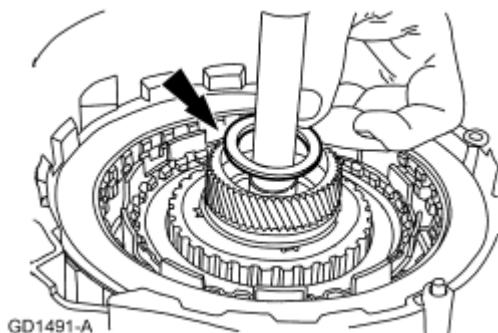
No. 5 Low/Intermediate Sun Gear Thrust Bearing
